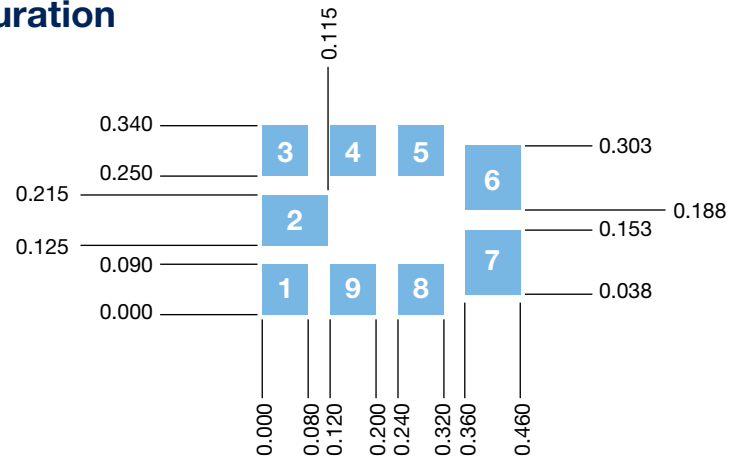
Recommended PCB Solder Pad Configuration (Top View)
